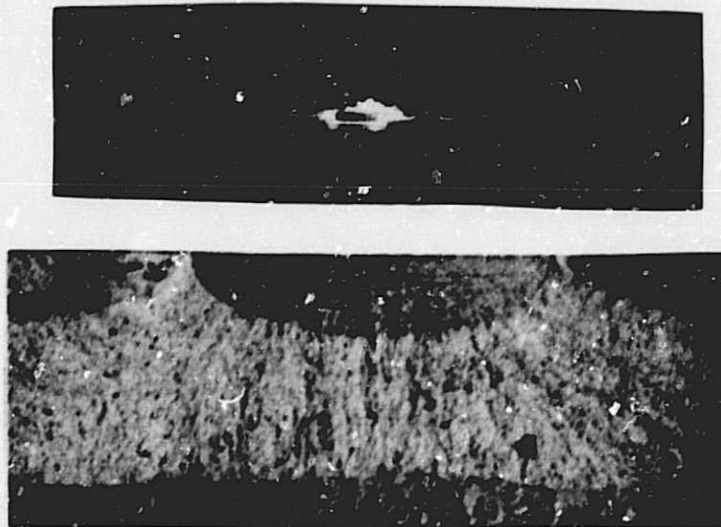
Fluorescent penetrant indication of a fatigue crack and macrograph of the fracture surface of specimen 6-4-0.125-6 at 10X.
